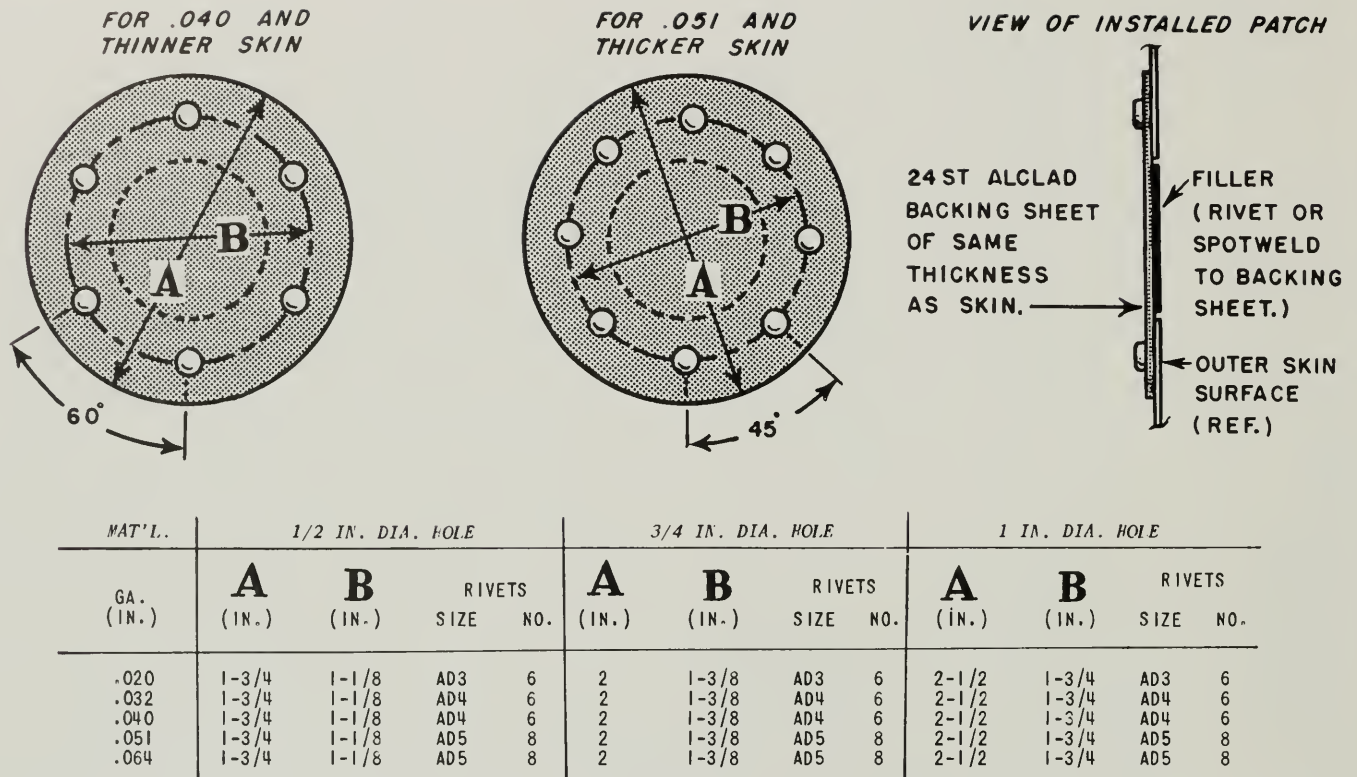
Patch for Skin Holes 1/2- to 1-inch Diameter
